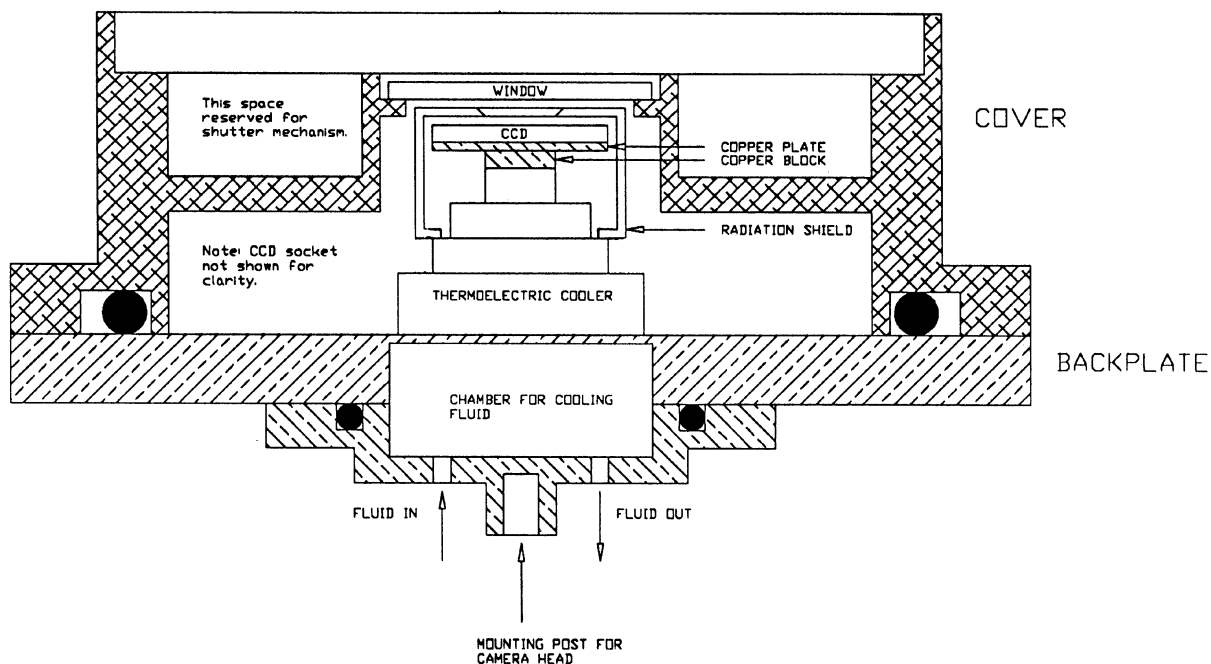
The design of the camera head, showing layout of the components inside the vacuum chamber. The figure is greater than life-size: the maximum width of the camera head is 114 mm.
